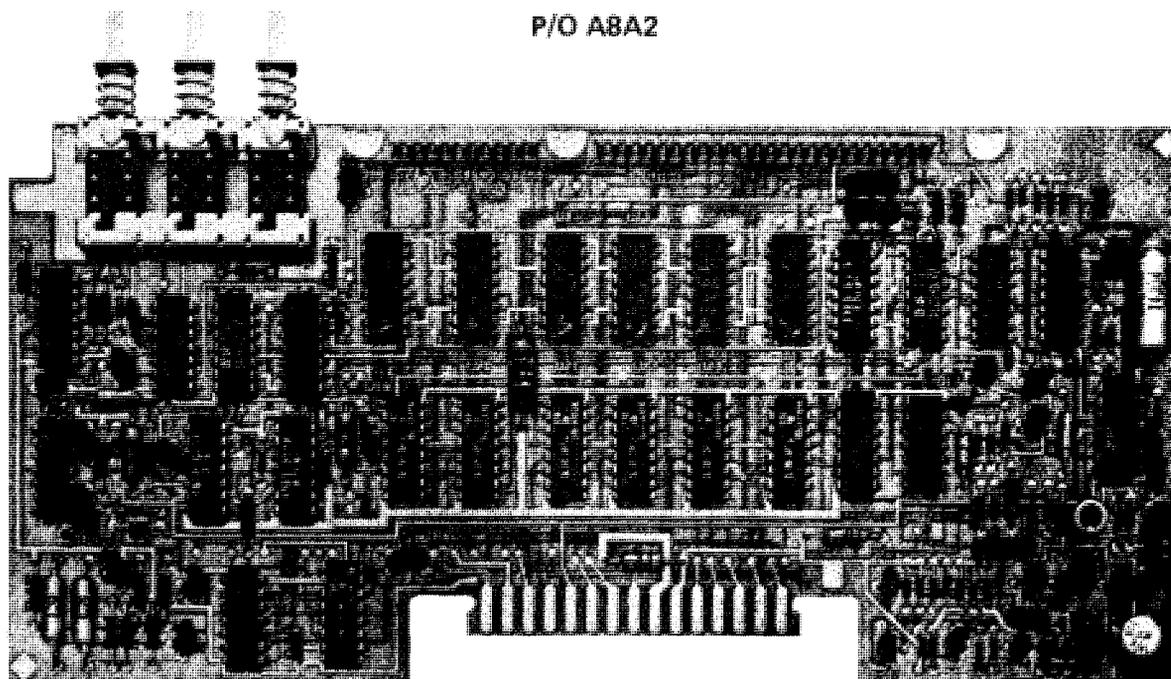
P/O A8A2 Counter/Lock Board Assembly Component Locations (P/O Change 6)
